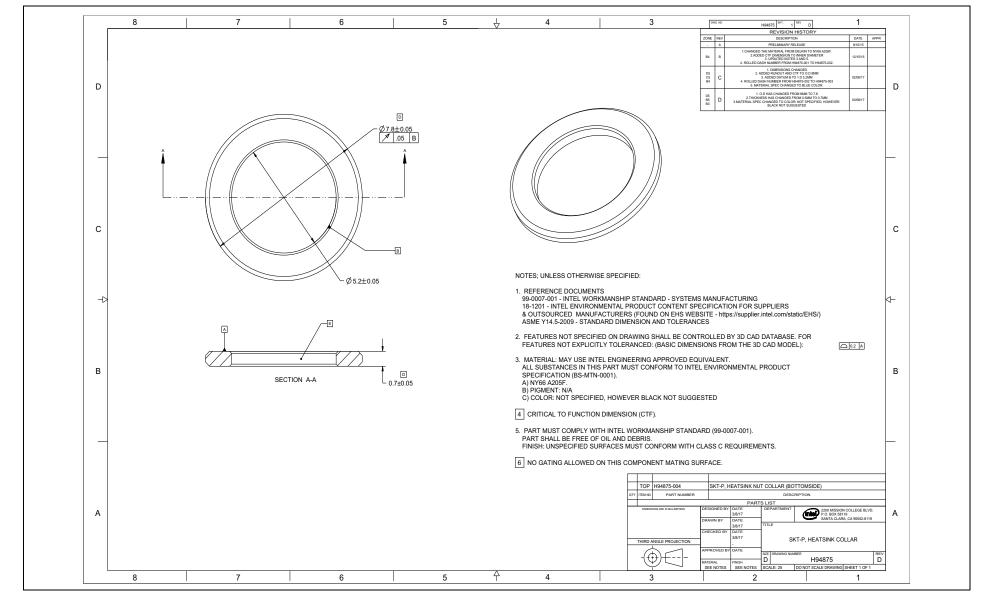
Heatsink Nut (Sheet 1 of 2)
